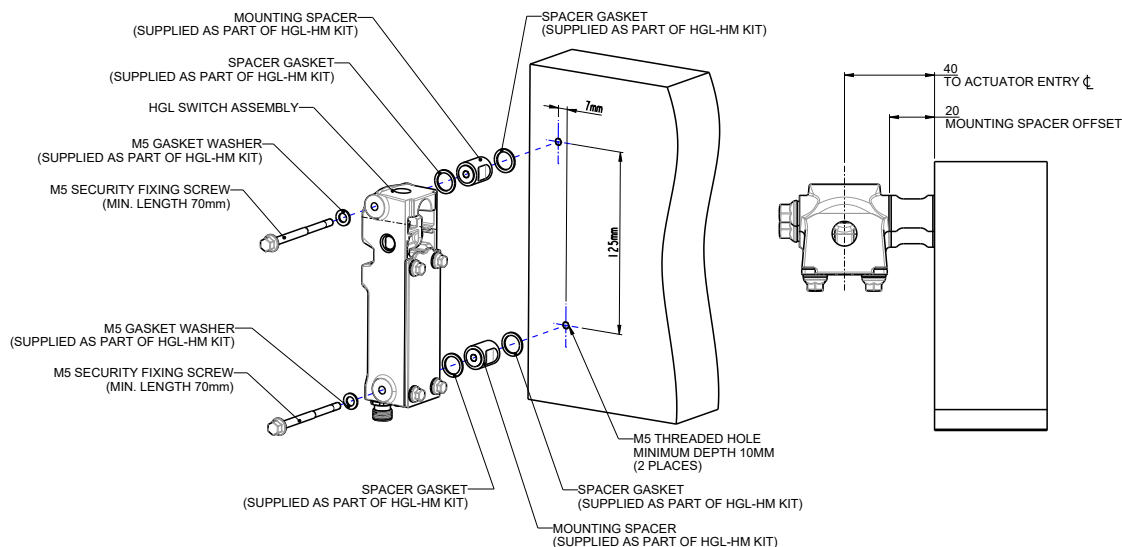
Switch Mounting using HGL-HM mounting kit and M5 threaded holes
